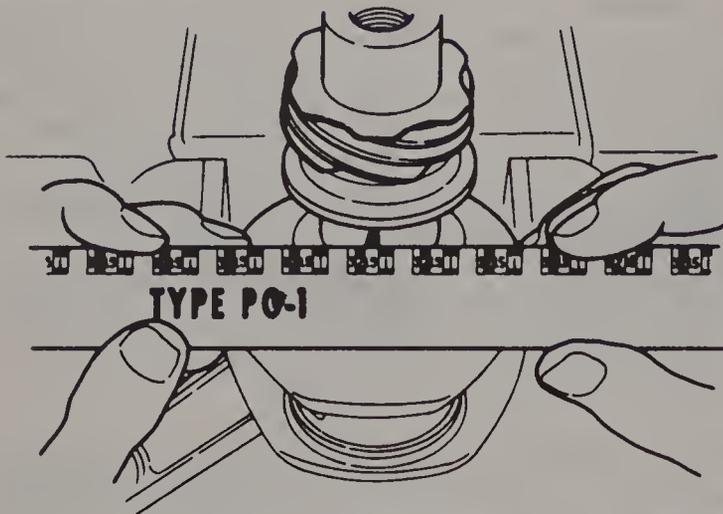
Compare the width of the crushed Plastigage to the scale printed on the container to obtain the main bearing oil clearance, (Sec 29)
